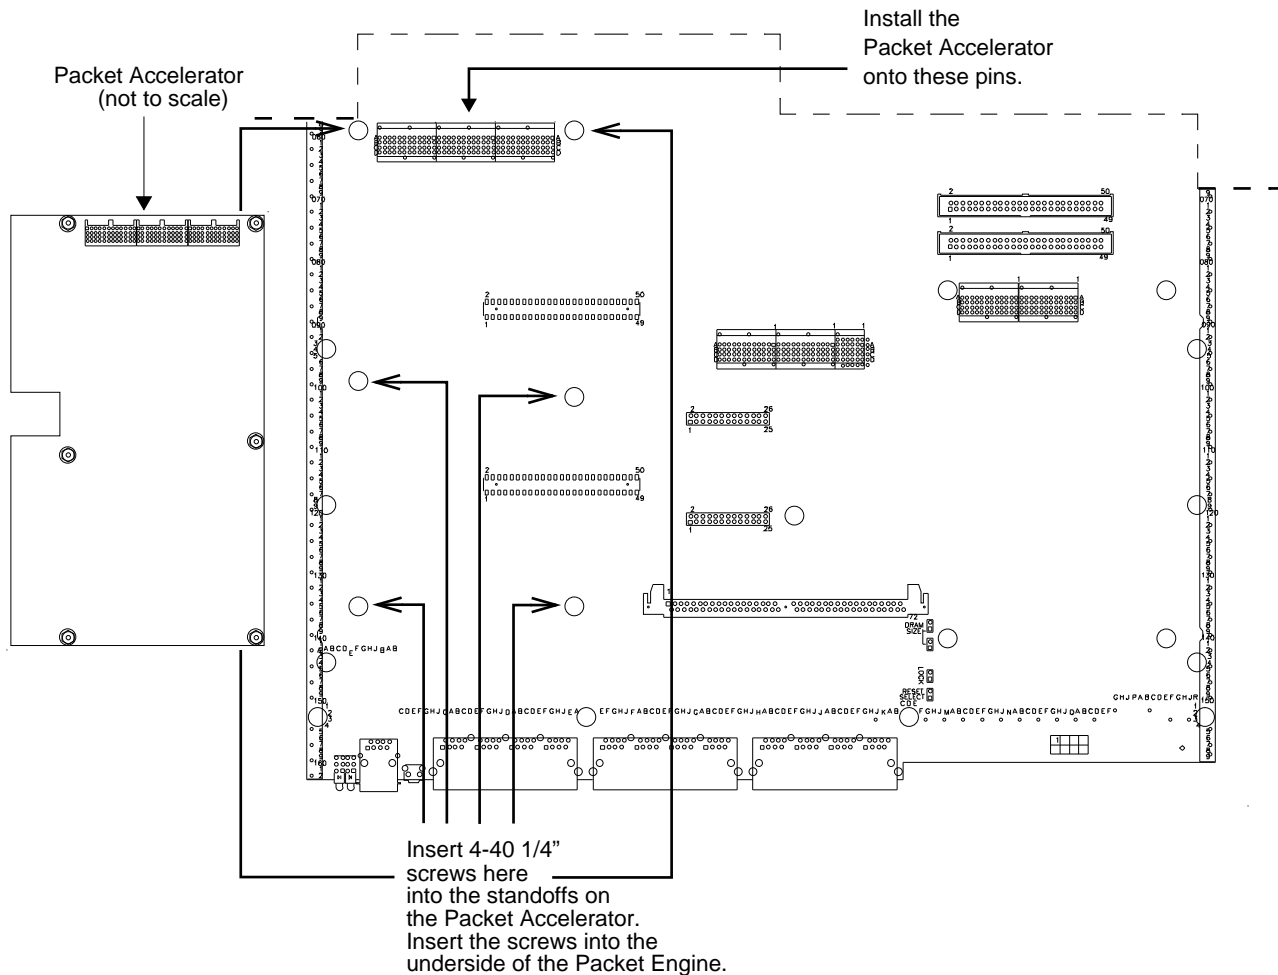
Where the Packet Accelerator is installed on the Packet Engine.
